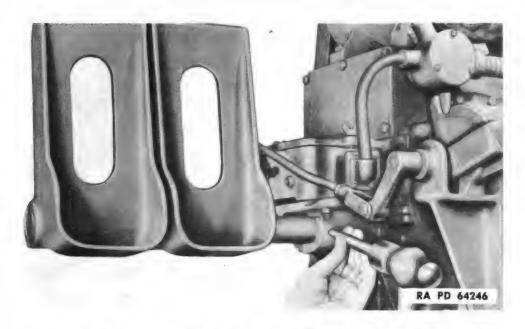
Removing Taper Pin from Foot Firing Rest Pedal Assembly
